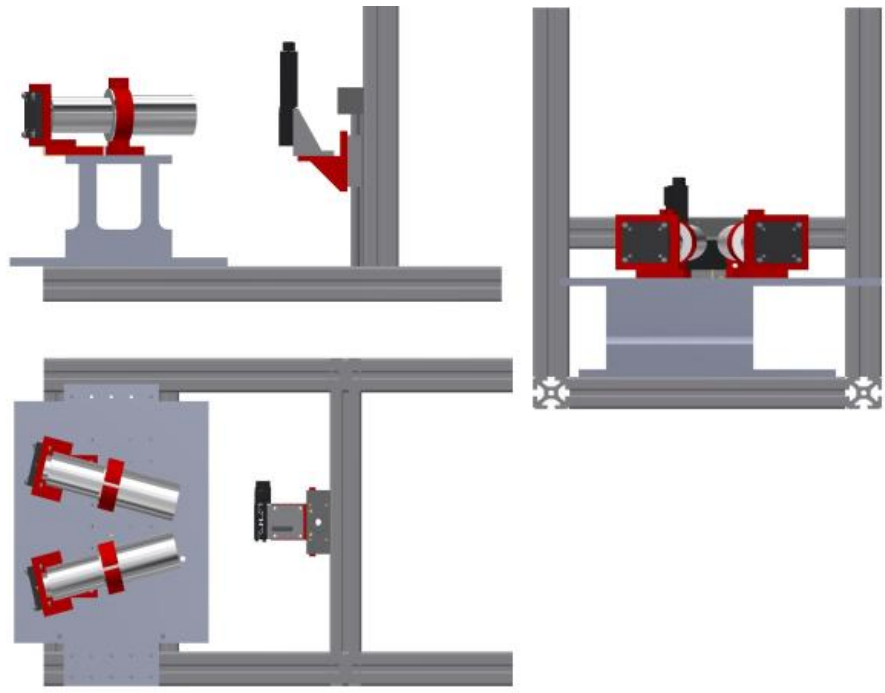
Full assembly, right view (top left), top view (bottom left), and front view (right)
